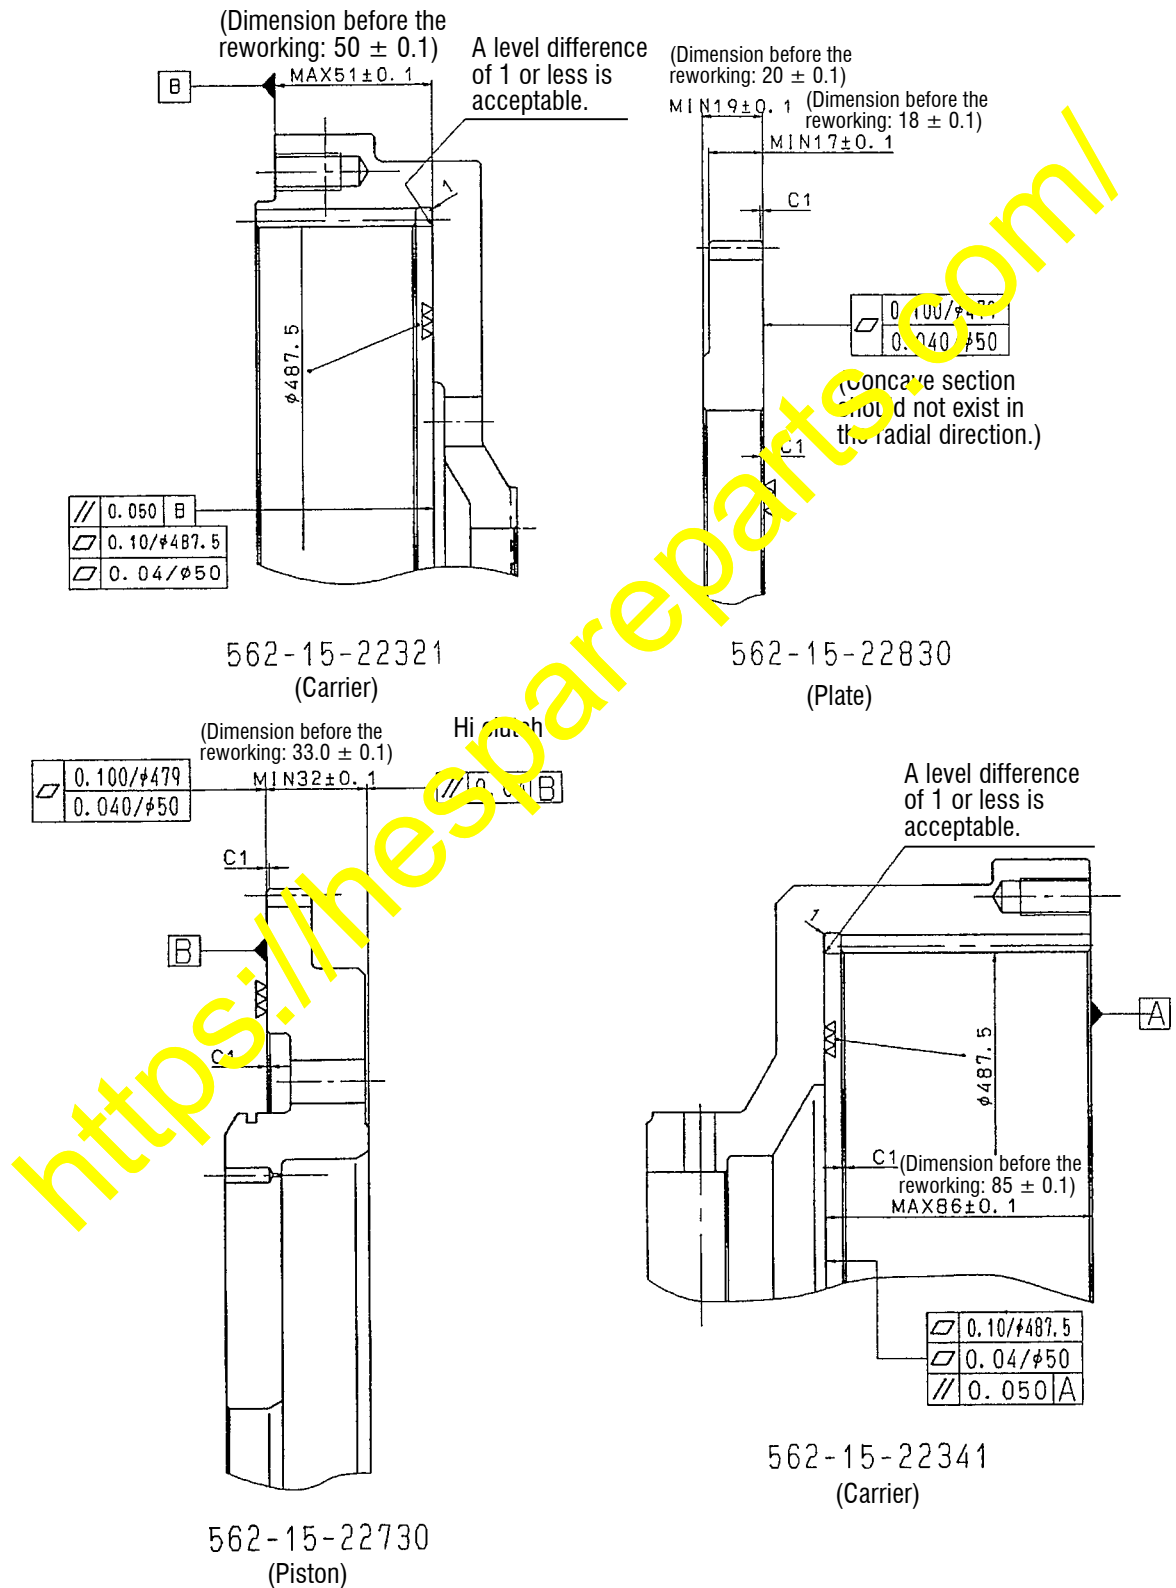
Detailed reworking drawing for the carrier, piston and plate
